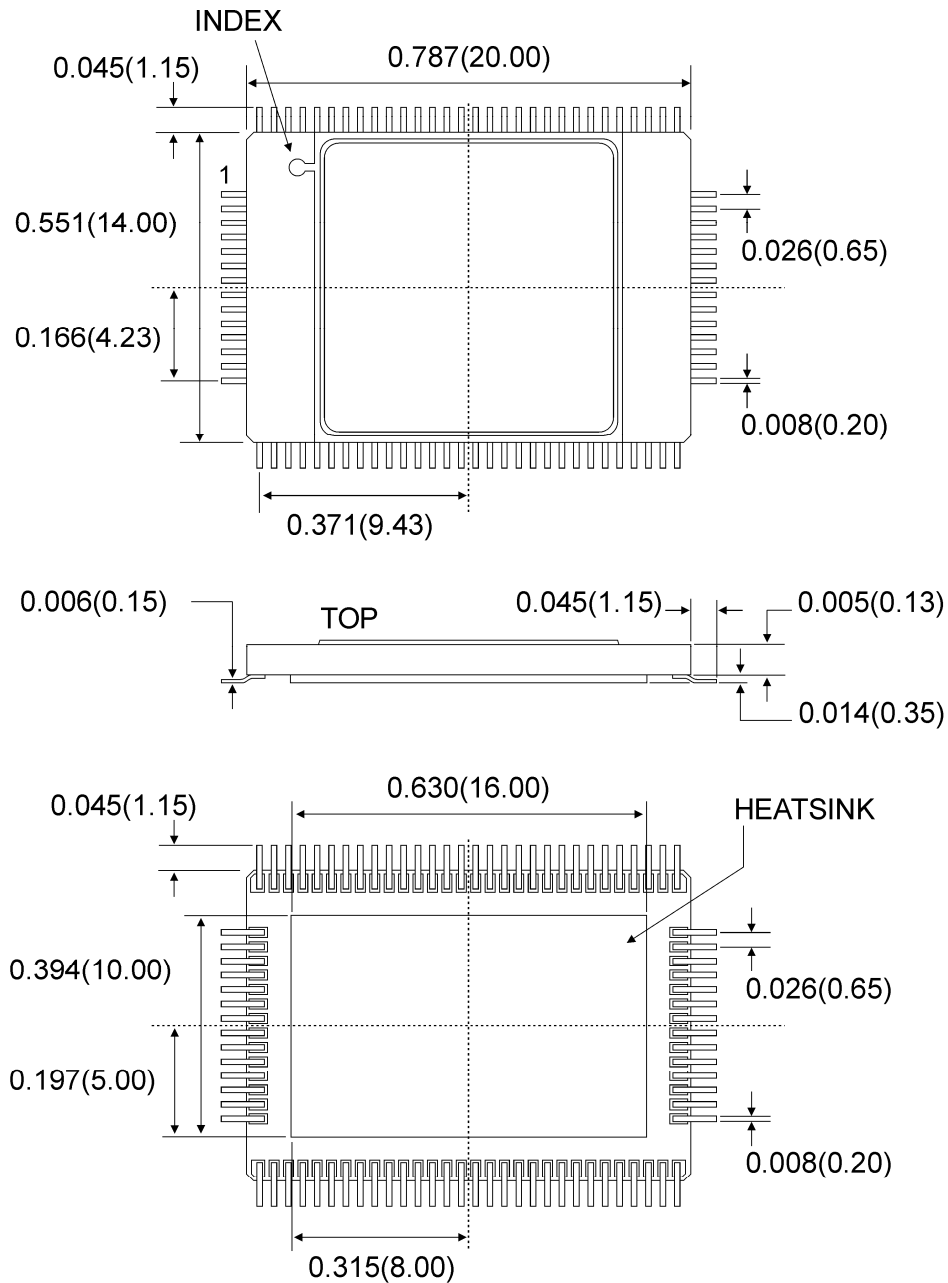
RDS010-QP package, dimensions shown in inches (mm).
